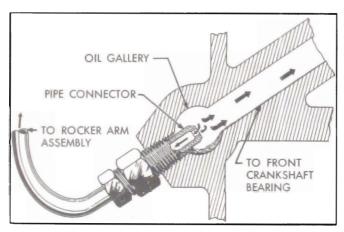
Sectional View of Oil Pipe Connection to Oil Gallery
